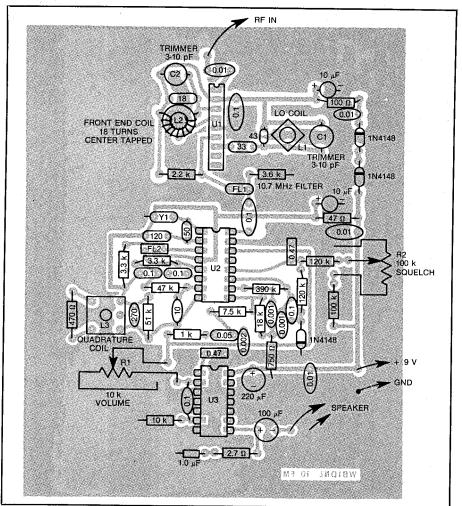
Parts-placement guide for 10-meter FM receiver, shown from the component side of the PC board. Gray areas represent an X-ray view of the circuit pattern. The etching pattern is given in the Hints and Kinks column of this issue. A PC board is available from A & A Engineering, 7970 Orchid Dr., Buena Park, CA 90620; tel. 714-521-4160. Price: \$13.75.
